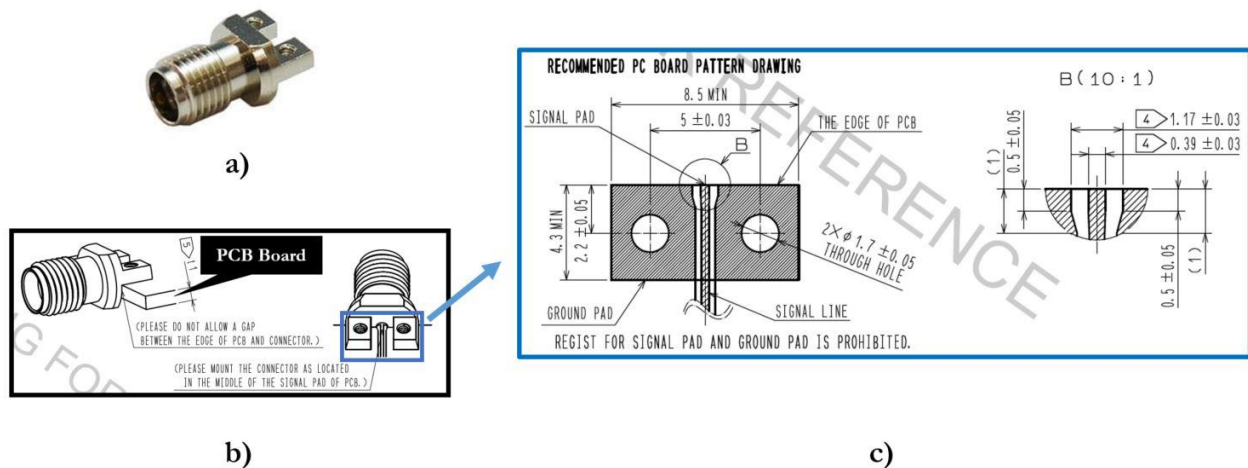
Chosen edge-mounted HK-LR-SR2 connector, from [48]: a) connector picture, b) assembly scheme of the connector on the PCB, c) recommended pad patterning with dimensions in mm.
